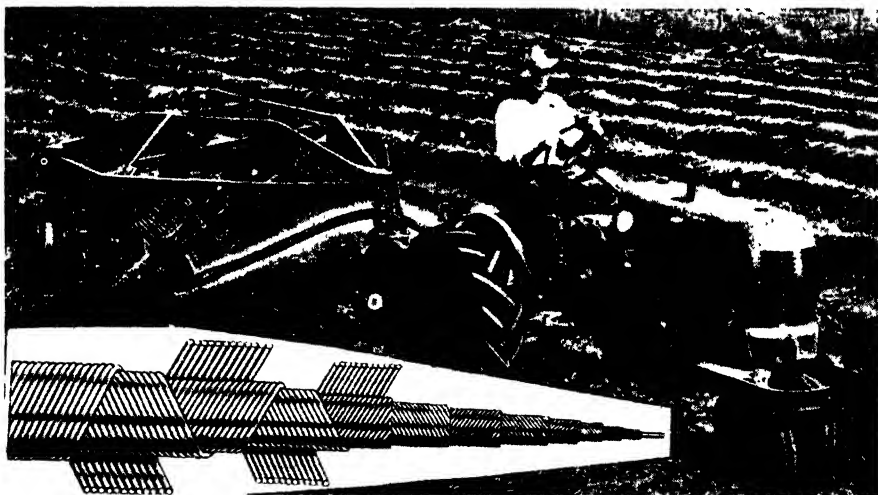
Flexible shaft operating side-delivery hay rake. The inset shows the construction of one type of flexible shafting. (Stow Mfg. Company.)
